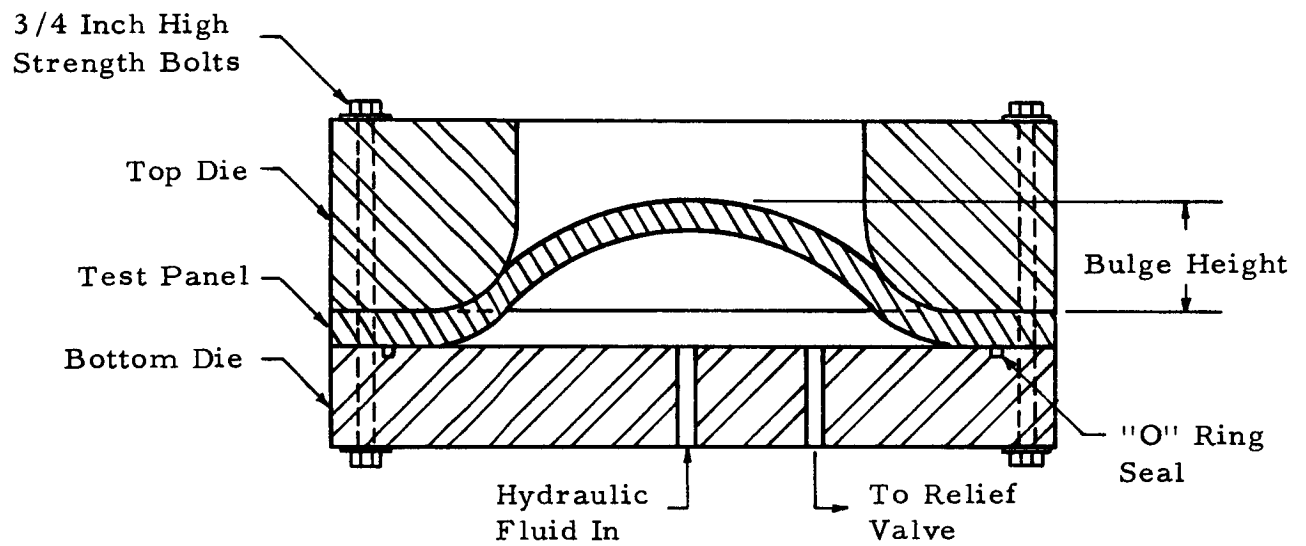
CROSS SECTION OF THE HYDRAULIC BULGE TEST FIXTURE
